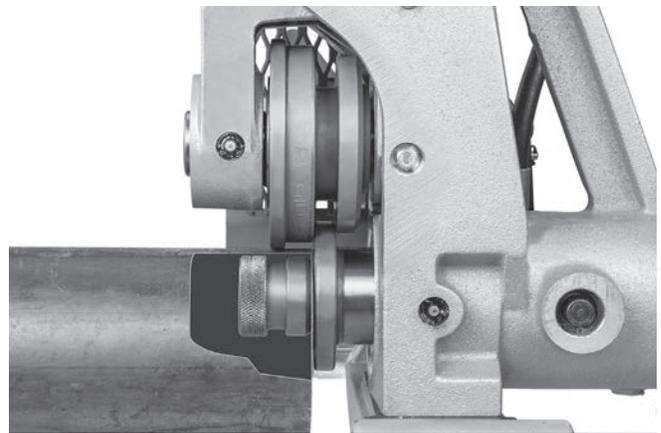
Placing Pipe Over Drive shaft, Flush to Drive Shaft Flange (Stabilizer Removed for Clarity)
